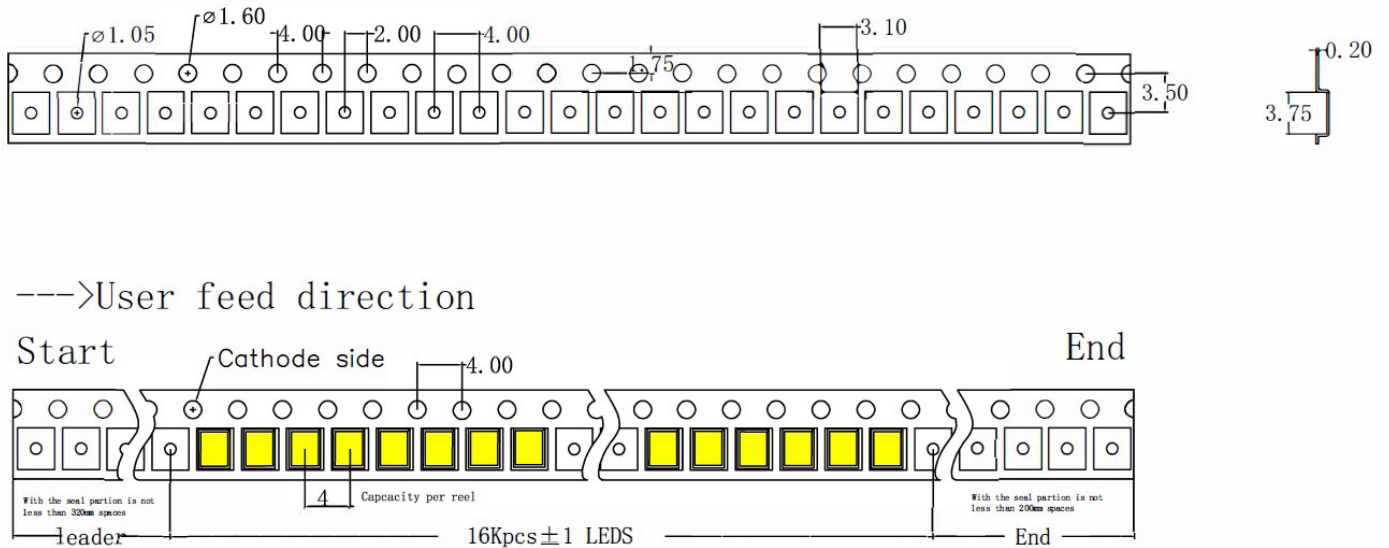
Pocket tape dimensions for LUXEON 2835 Commercial Deep Dimming (L128-xxxxSA35A0DGx)
